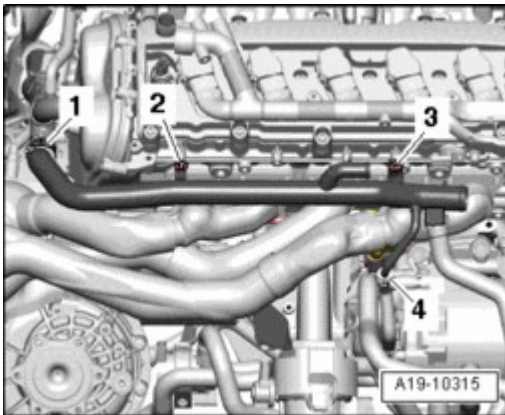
Removing Bolts, Loosening Hose Clamps And Removing Right Coolant Pipe From Coolant Hoses
